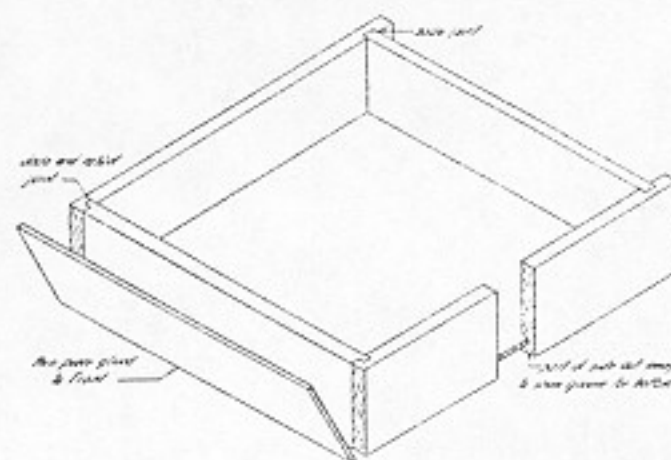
Simple drawer construction, showing dado, groove, and dado-and-rabbet joints.
